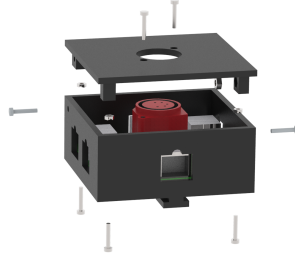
The picture illustrates the assembly process and includes all necessary parts.
